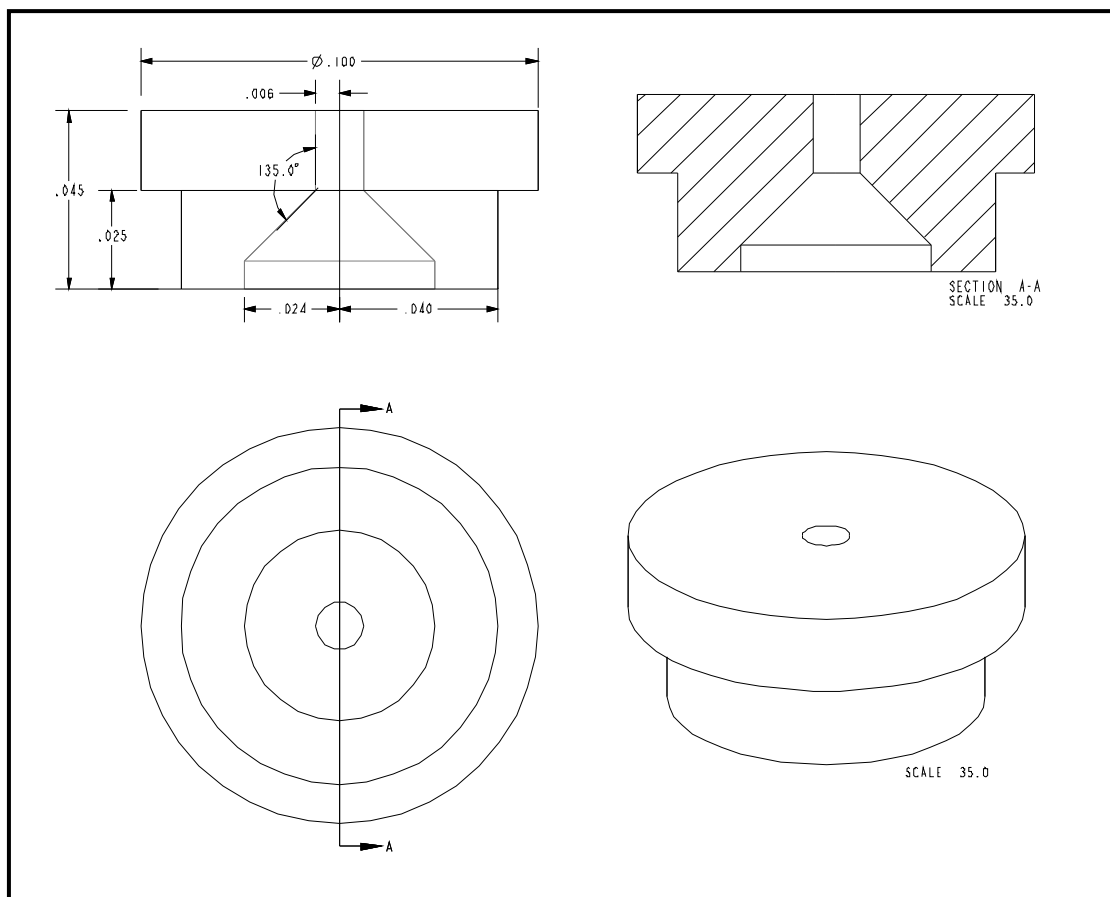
CAD Drawing of the SPP Prototype – Air Cooled Nozzle Inner Tip
